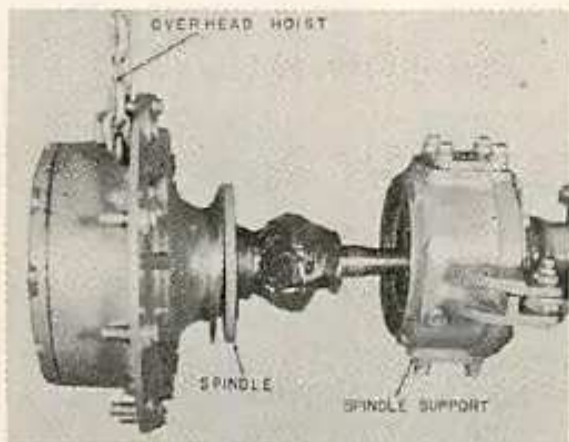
Planet spider, wheel hub and axle shaft assembly can be removed as shown.
